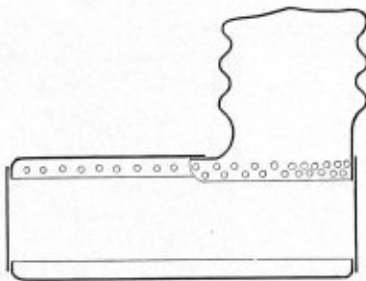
SECTION OF COMBUSTION CHAMBER, SHOWING ONLY LINE OF RIVETS DISTURBED.
